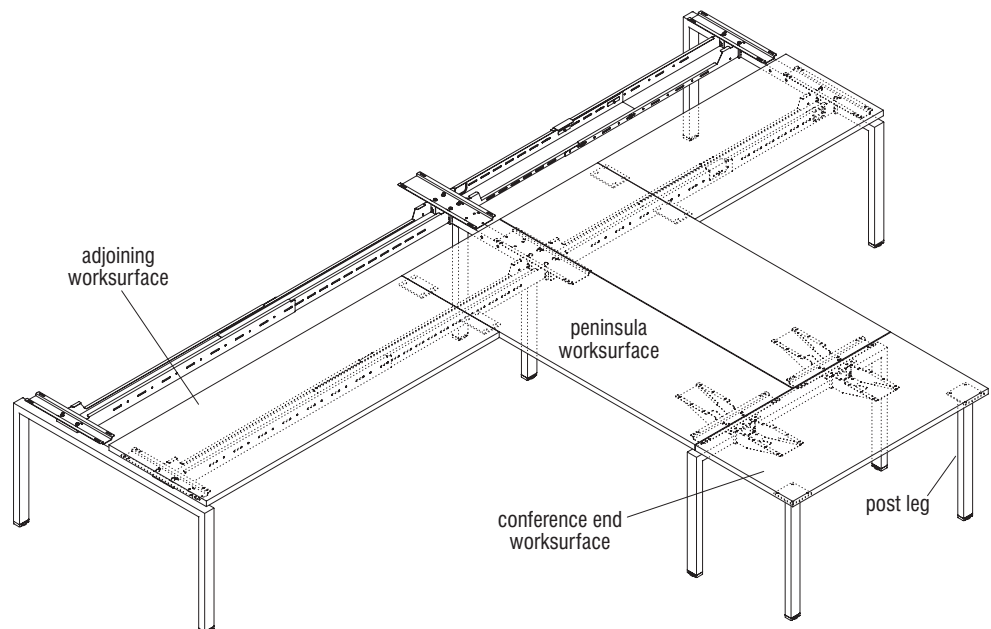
Conference End with Adjoining Dual-Sided Peninsulas
